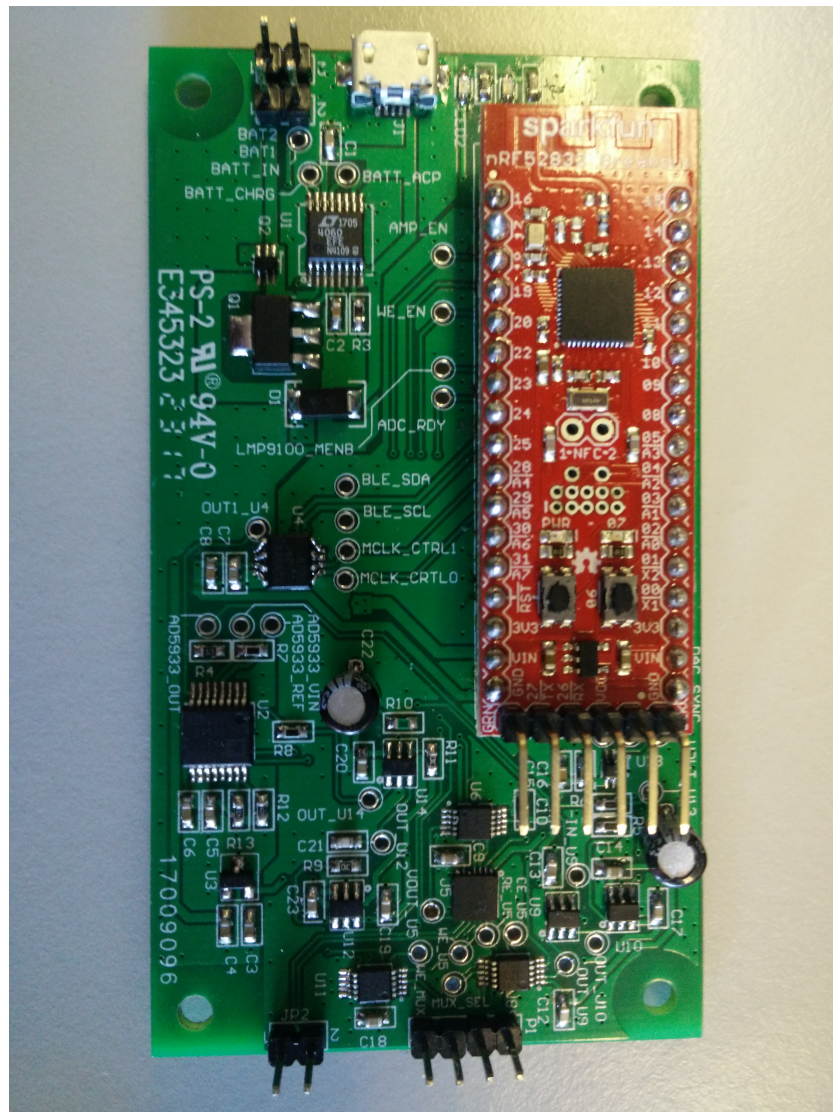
Complete PCB with Sparkfun breakout board
